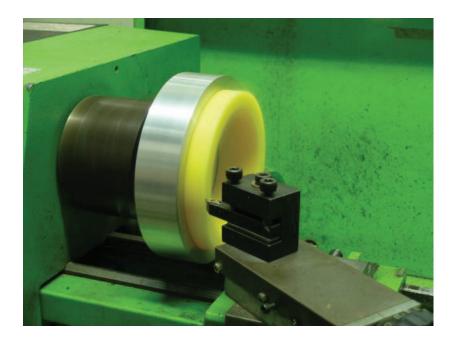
Secondary machining on lathe to obtain final ring width dimension. The holder is used to conveniently obtain parallel sidewall surfaces as well as to cause minimum ring deformation during machining
